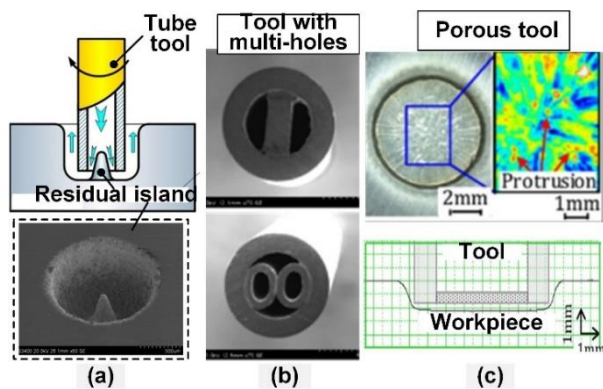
(a) Residual islands on the workpiece; (b) Tools with multi-holes and the machined hole (Zhang et al., 2016b); (c) 3D printed porous tool and the machined profiles (Koyano et al., 2017).
